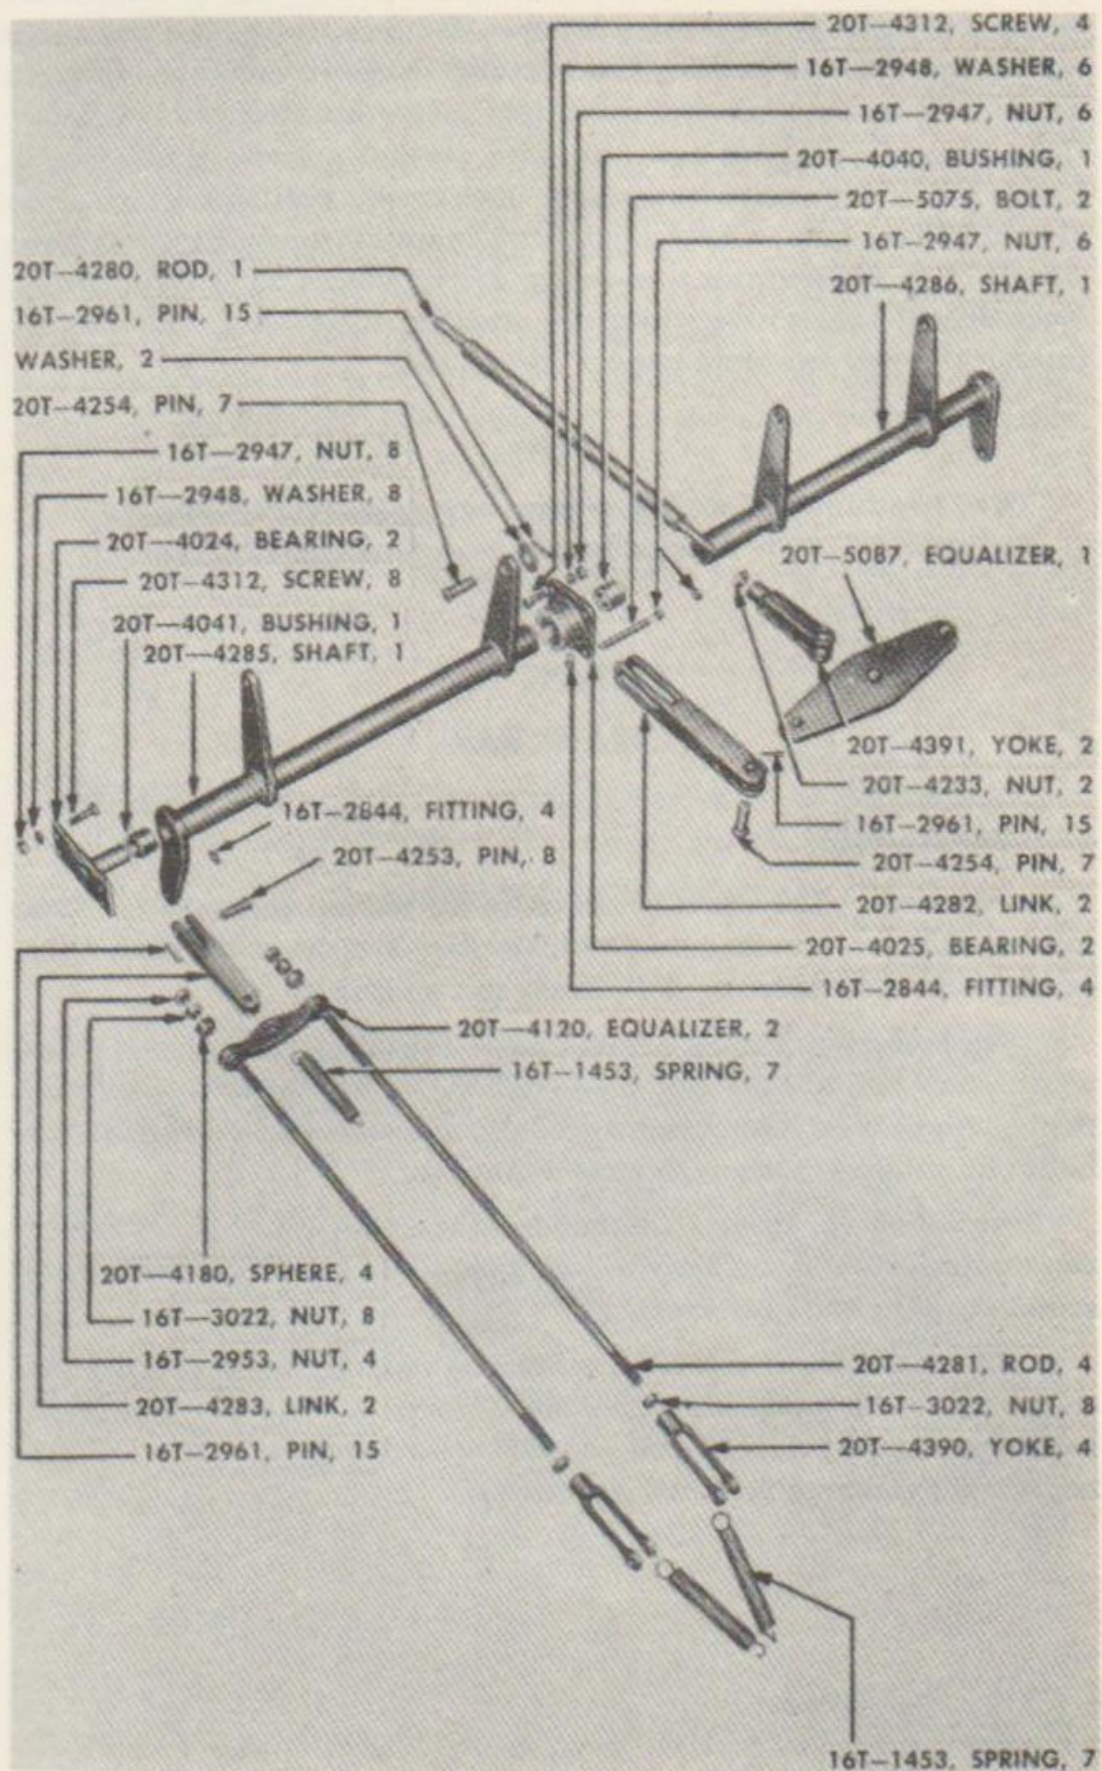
HAND BRAKE—EXPLODED VIEW
